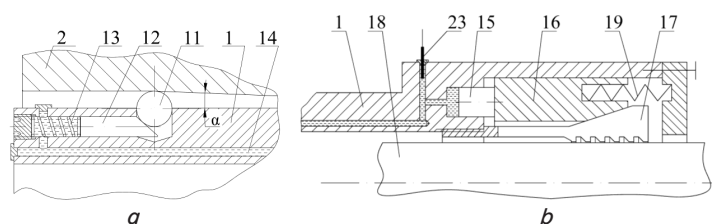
Fragments of the automatic clamping mechanisms design: a – wedge mechanism with a hydraulic system plunger; b – fragment of the collet chuck driven by a hydraulic system plunger
